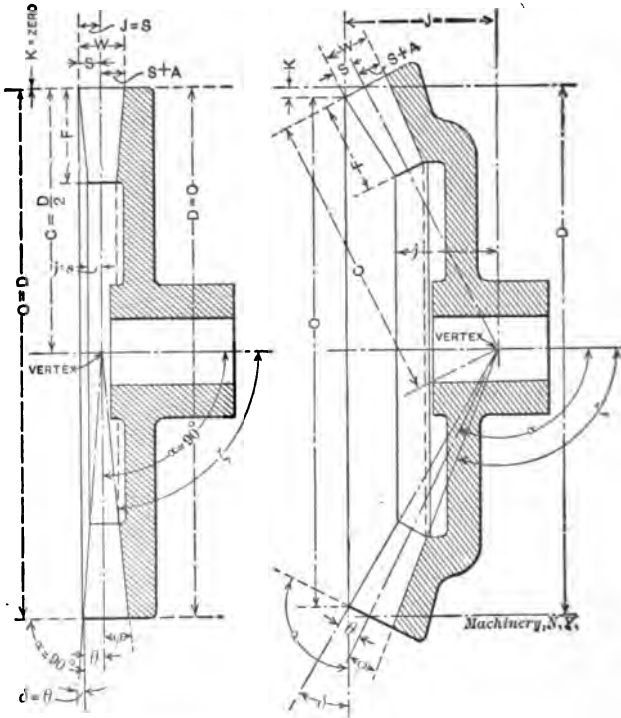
Dimensions for Crown Gear Fig. 11. Dimensions for Internal Bevel Gear
